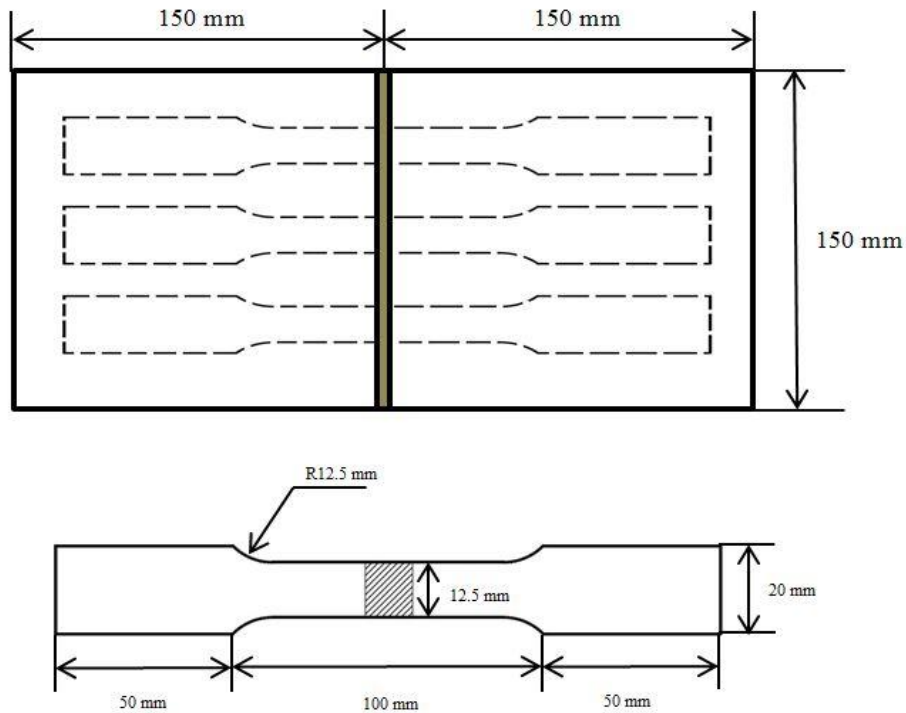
Schematic illustration butt joint welding setup and design for tensile test
